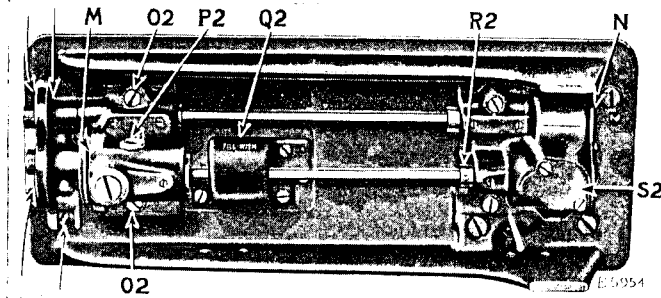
BASE VIEW OF MACHINE 110 w 121
